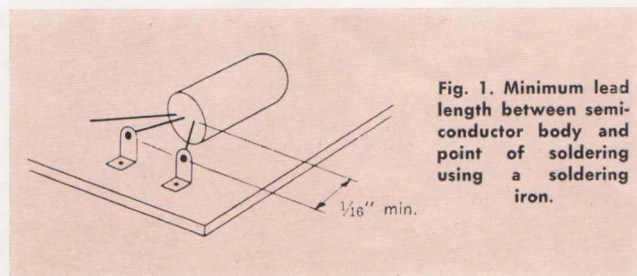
Minimum lead length between semiconductor body and point of soldering using a soldering iron.
